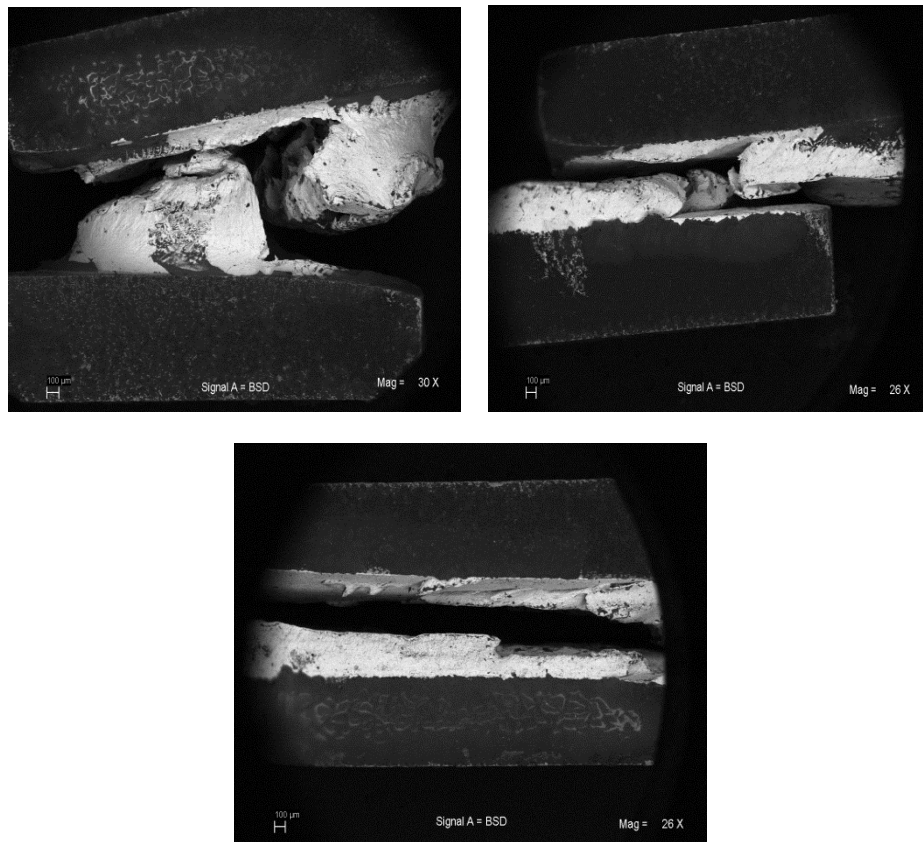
Scanning electron microscopy images on the fracture surface of solder joint after shear test
